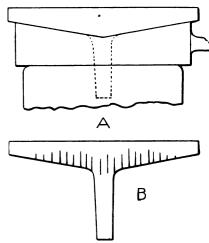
A. TOOL USED FOR DRAWING OUT. B. RESULT OF WORKING IRON TOO COLD.
